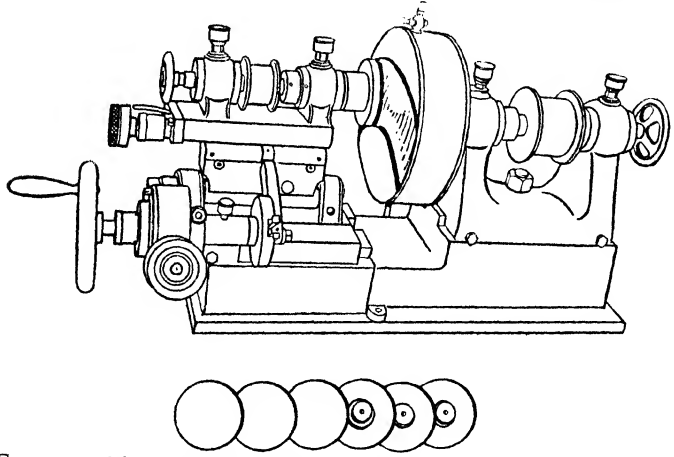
Flat grinding machine; the stones are fixed to a plate, a diamond-impregnated disc with rotating and oscillating movement serving as a tool
